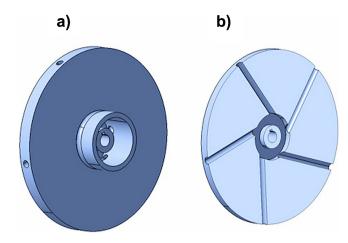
Drilled impeller: (a) overview and (b) cross-section with the plane perpendicular to the impeller axis of rotation.
